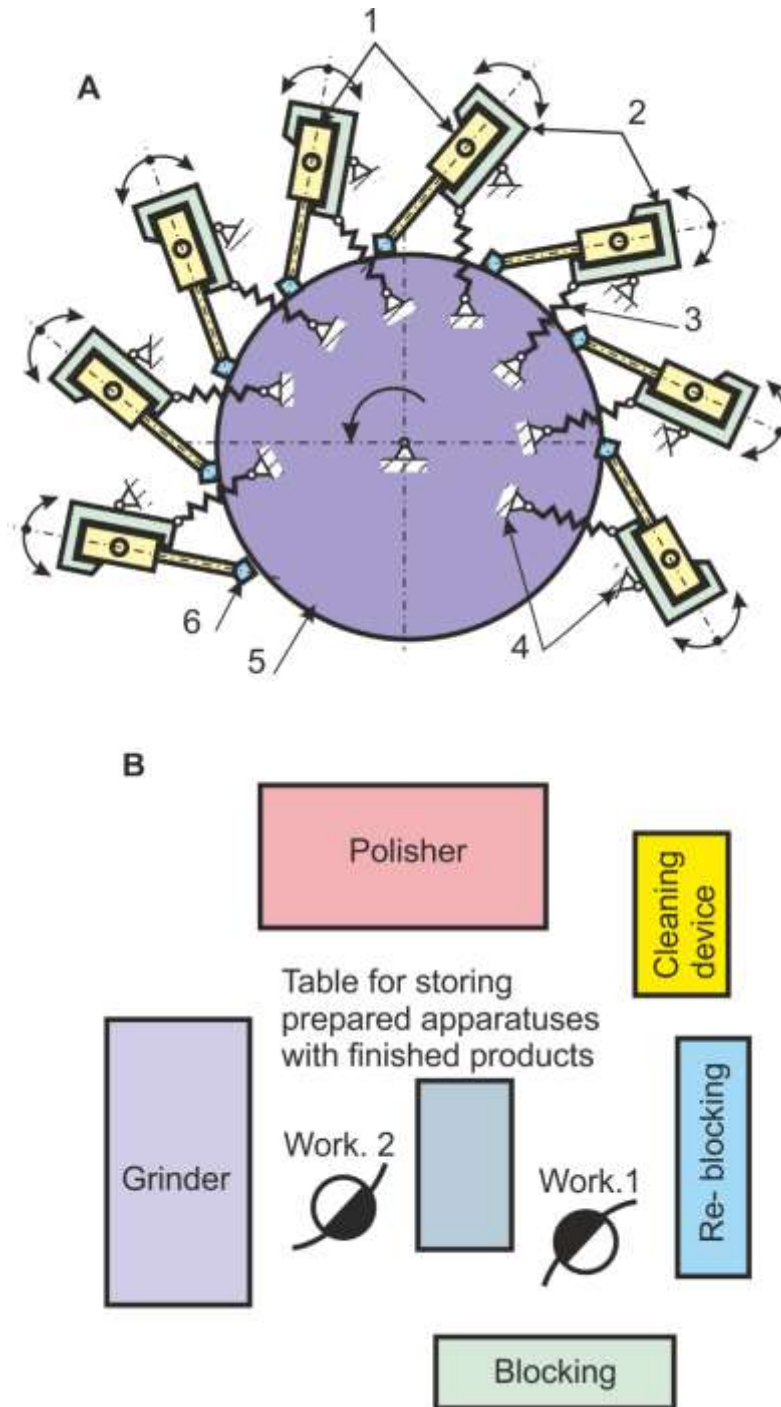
Diagram of cylindrical grinder: A - principle of technology, B - grinding assembly ("composition"), 1 - apparatuses, 2 - flaps with tilting of apparatuses, 3 - spring, 4 - machine frame, 5 - cylindrical grinder, 6 - ground chaton
